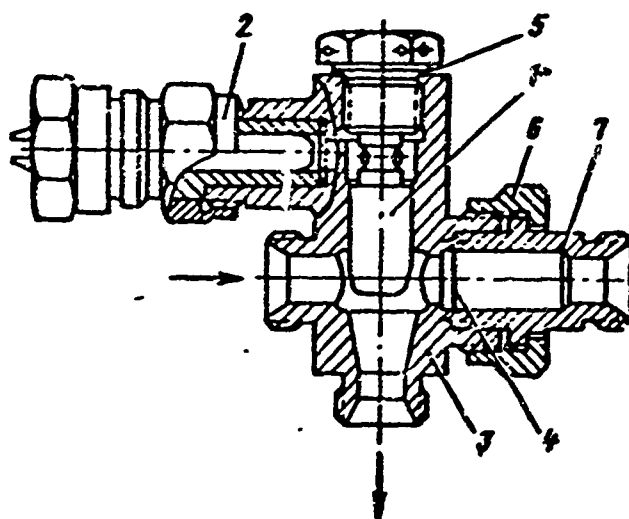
Direct-action explosive valve, shown in Fig. 2.16, after modification: 1 - valve; 2 - explosive cartridge; 3 - housing; 4 - diaphragm; 5 - seal; 6 - nut; 7 - connector tube.
